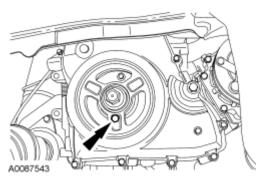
Aligning Crankshaft Pulley Bolt Holes Courtesy of FORD MOTOR CO.
